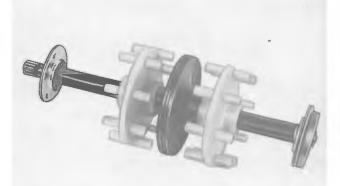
Removing Drive Shaft-Snowmobile (Serial No. -80,000) Illustrated
